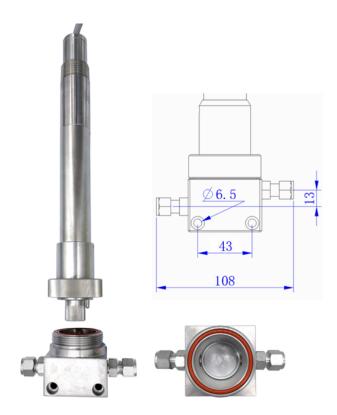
Pipeline installation using ST-774 Flow Cell Assembly (P/N: 53718) with dimesions (mm)
